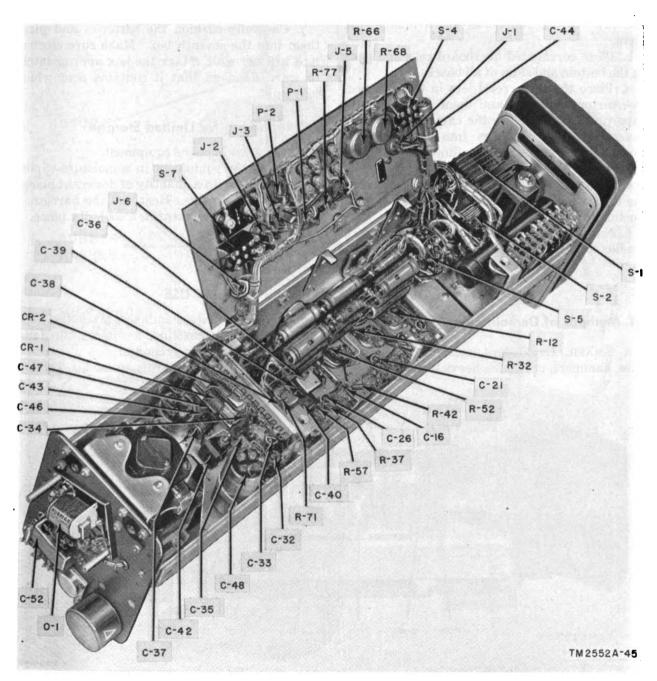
Recorder BC-1323-A, right side cover removed showing parts.
